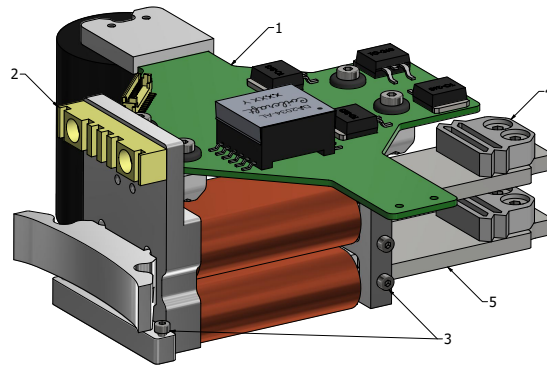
v2020 kicker module. 1) Charging PCB with capacitors. 2) Damper for dribbling device. 3) Mount points for pull-back springs. 4) Printed plunger dampers. 5) Ferromagnetic plunger part.
